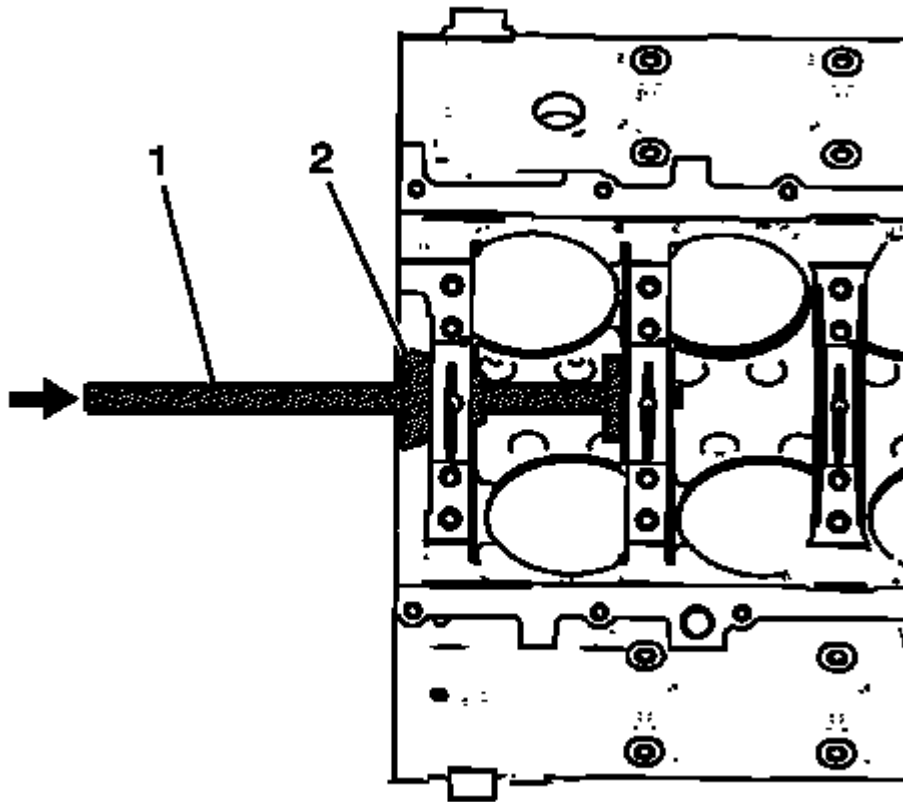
Driving Bearing Out Of Or Into Engine Block
